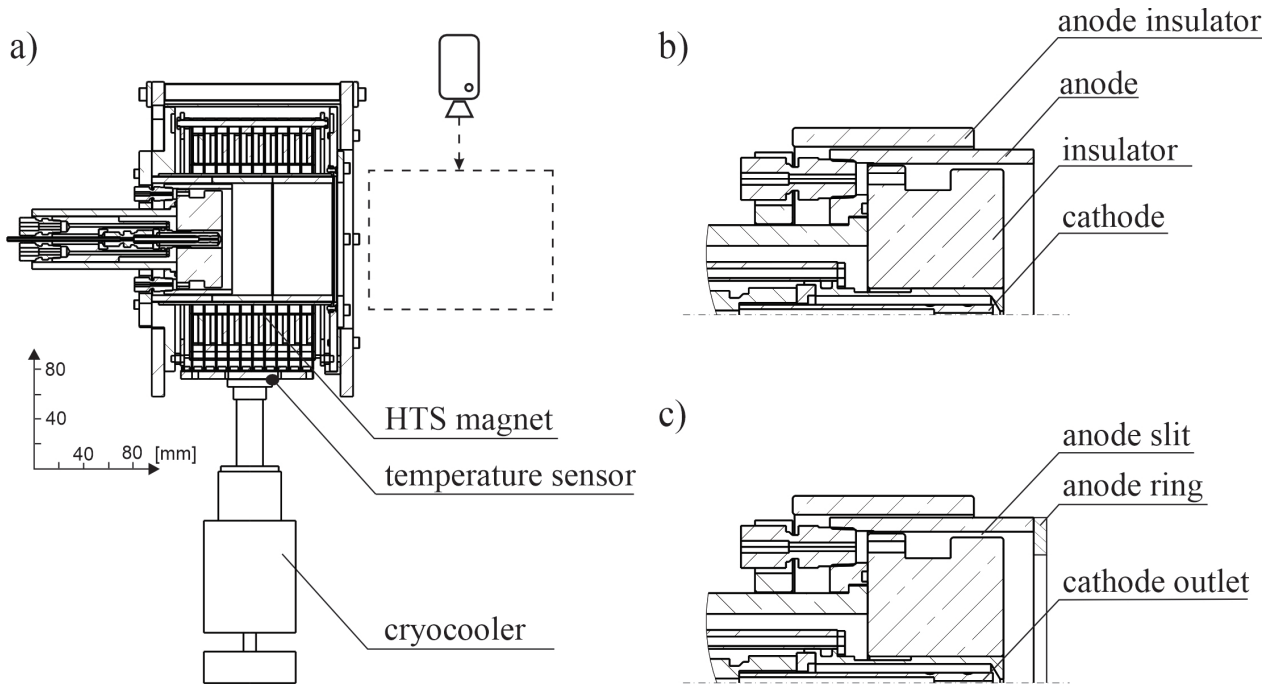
Diagram of the CC-EST and HTS magnet assembly used in testing. This assembly was mounted on a suspended thrust stand internal to a vacuum chamber (not shown). a) The CC-EST was mounted in bore of the HTS magnet. The HTS magnet temperature was maintained by a cryocooler mounted to a copper "thermal bus" which was conductively coupled to the magnet coils. A camera external to the vacuum chamber captured visual data showing the effect of the HTS magnetic field on the plasma during testing. b) close-up of "cylinder" thruster configuration. c) close-up of "convex" thruster configuration, where an anode ring is used to reduce the inner diameter of the anode.
